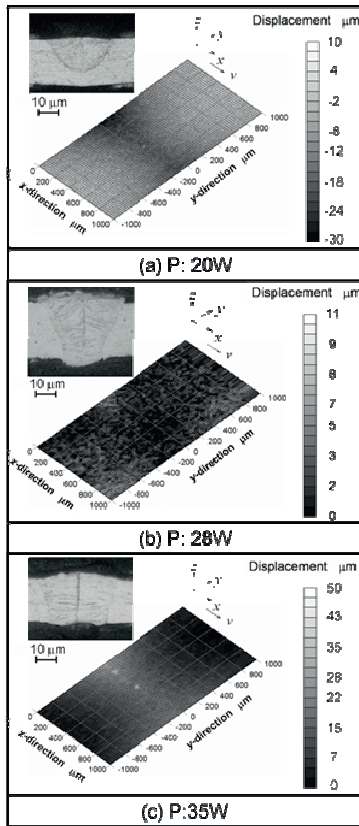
(a)-(c) Weld bead geometry and measured displacement at 20W, 28W and 30 W in the case of 20 μm thickness sheet (v: 1.0m/s, d: φ35.0μm)
